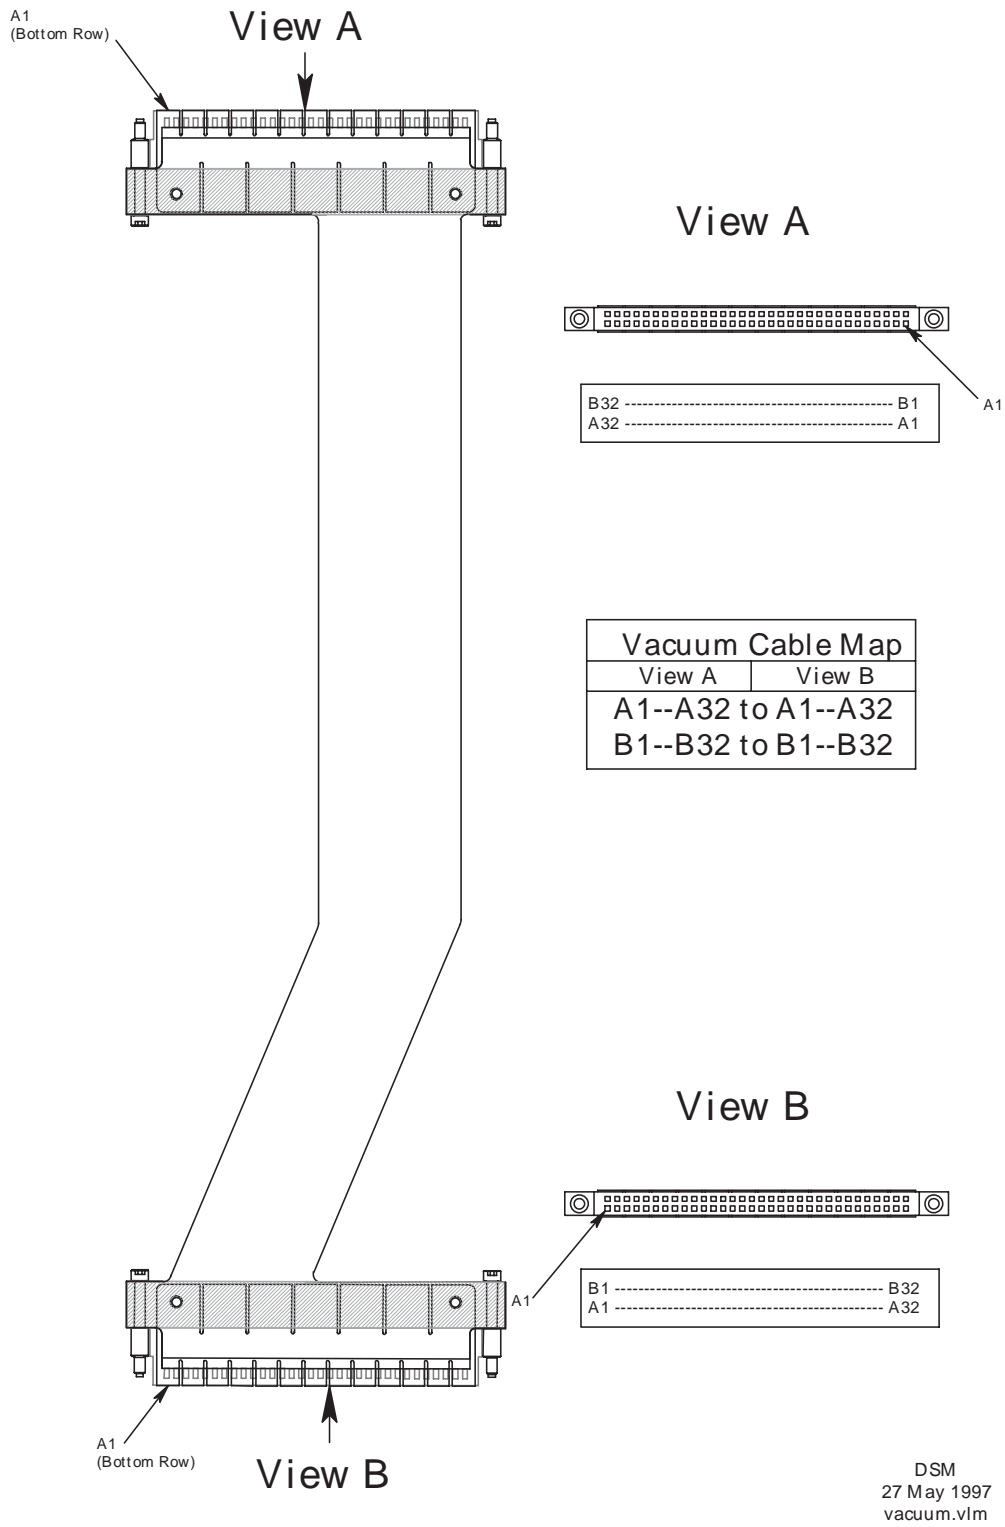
Vacuum cable between the cold and warm flanges of the feedthroughs.
